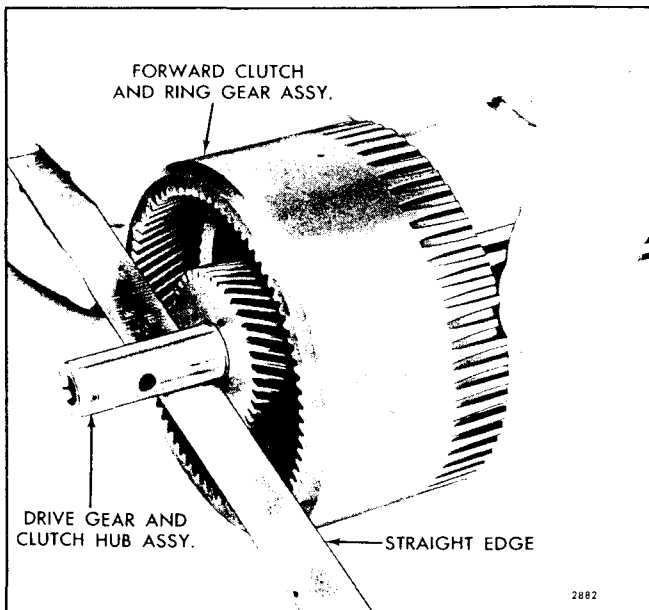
Aligning Rear Face of Drive Gear with Face of Ring Gear
